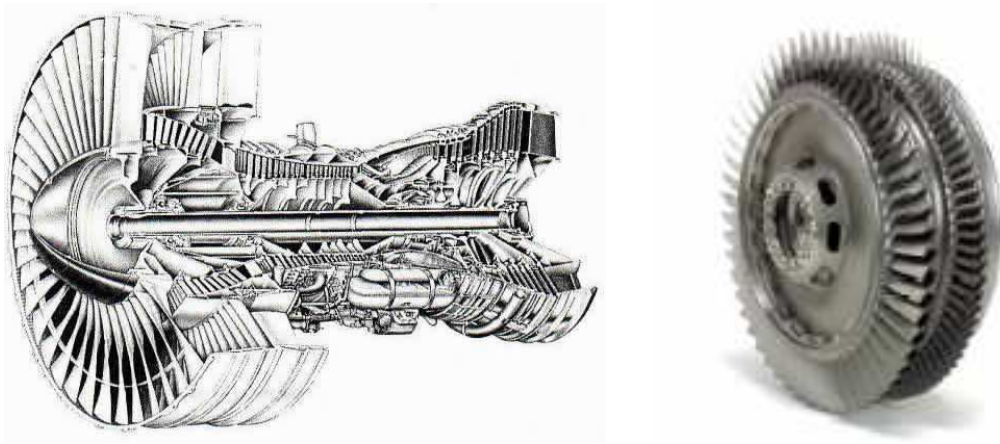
(a) Cross-section of Pratt & Whitney JT9D-7J engine powering Boeing 747, (b) Typical bladed disks (from www.mtu.de)
